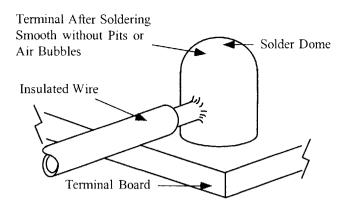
A Finished, High Voltage Terminal Assembly.
